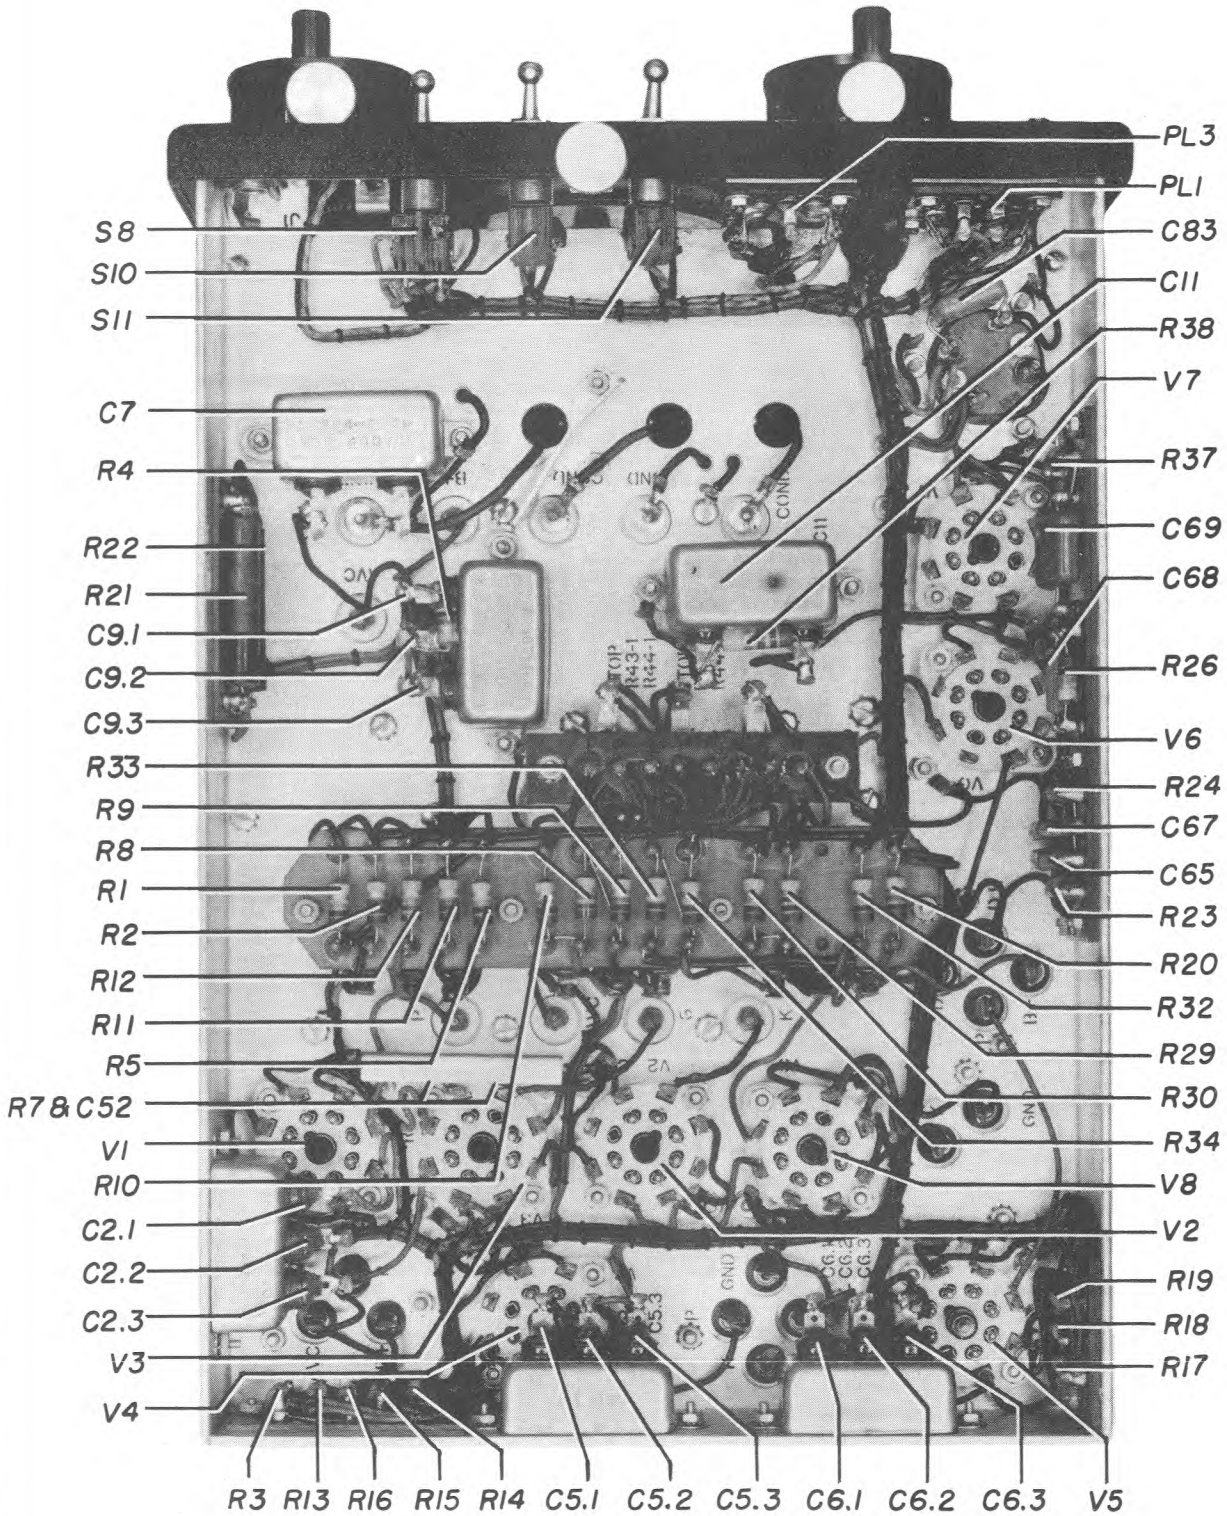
TYPE RA-1B AIRCRAFT RECEIVER (BOTTOM VIEW)
